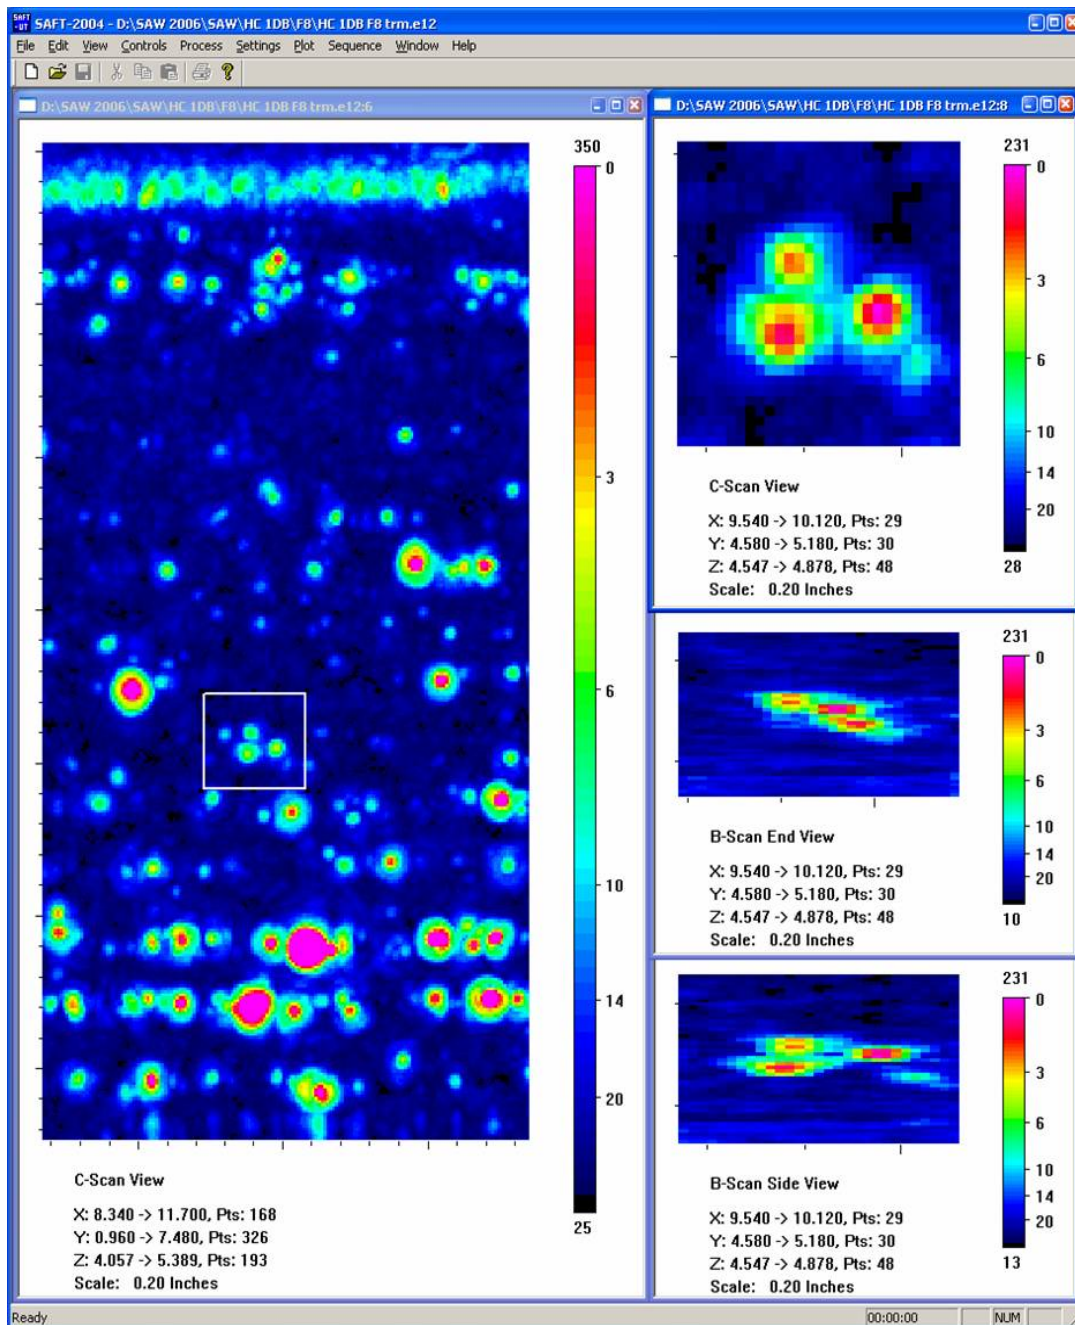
a 10 MHz F8 Immersion Testing Images of Small Fabrication Flaw: *HC3A*. This figure shows immersion testing data of a 7-mm flaw indication from the weld-normal testing of large weld segments. The flaw indication is identified in the box drawn in the SAFT-UT image on the left in the figure. A close up of the flaw in the C-scan view (top right) shows 3 unresolved flaws.
